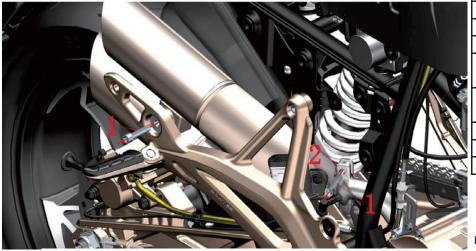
MUFFLER		Muffler rear assembly	CHK	(0)
